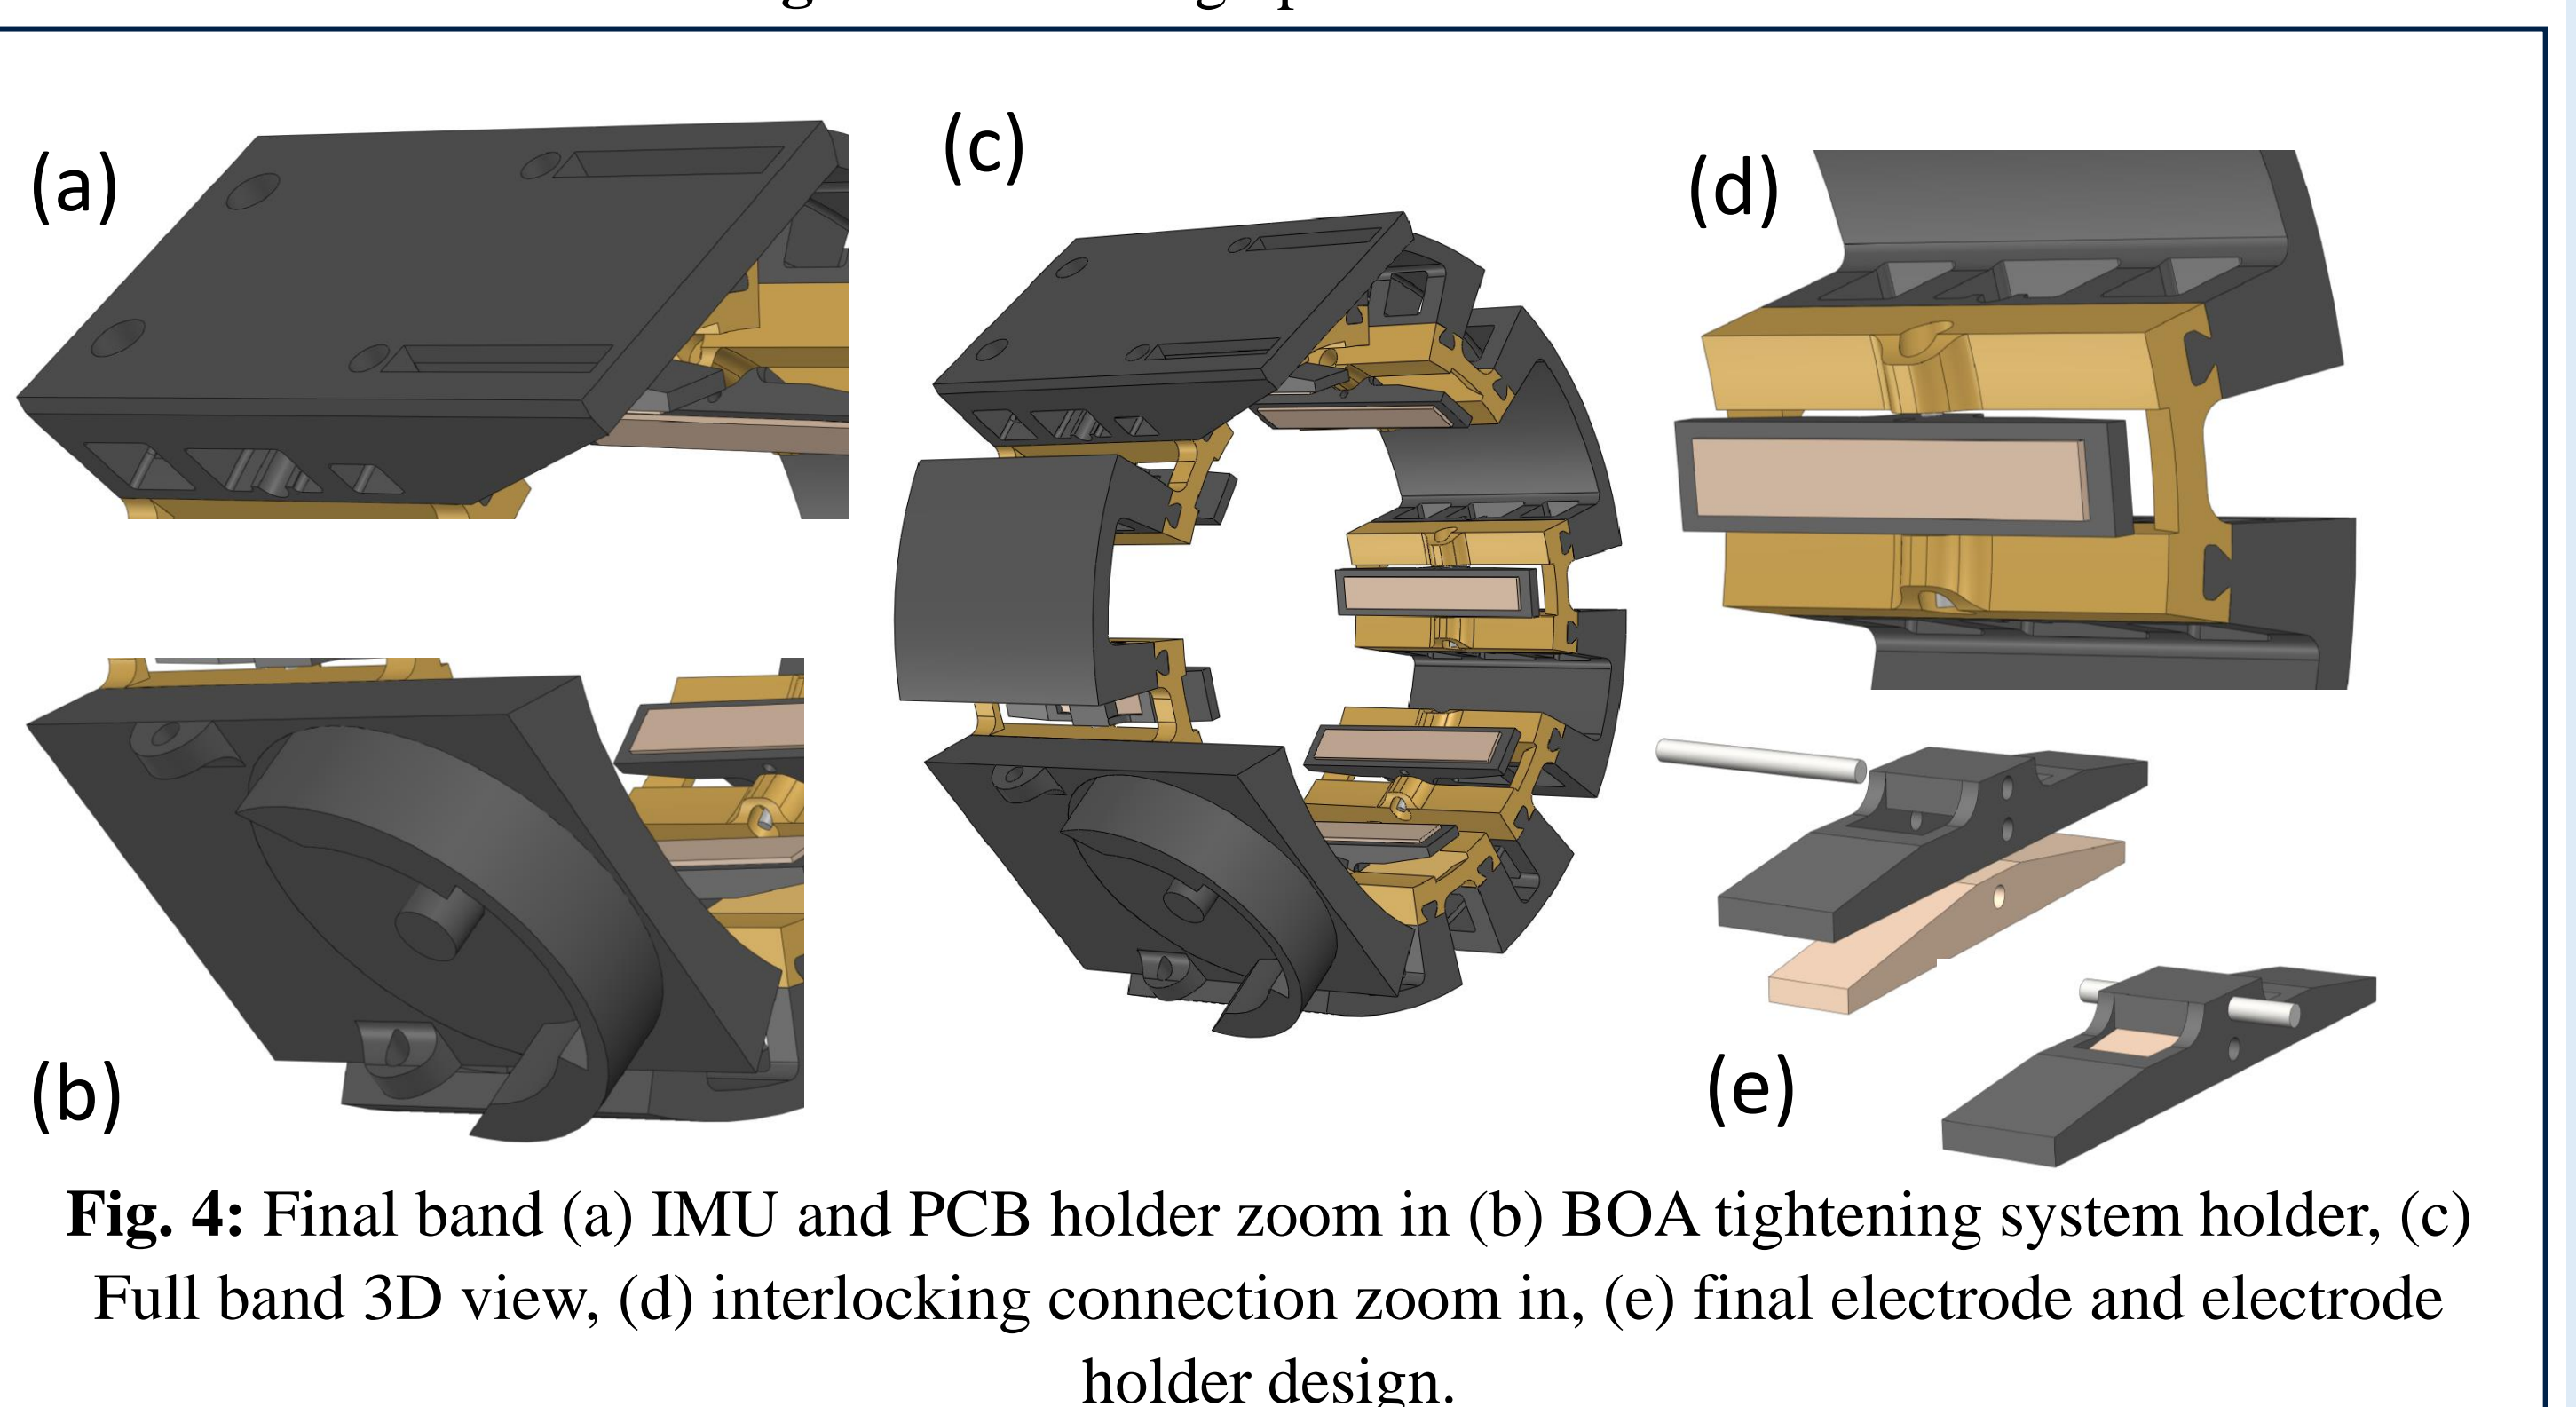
Final band (a) IMU and PCB holder zoom in (b) BOA tightening system holder, (c) Full band 3D view, (d) interlocking connection zoom in, (e) final electrode and electrode holder design.
